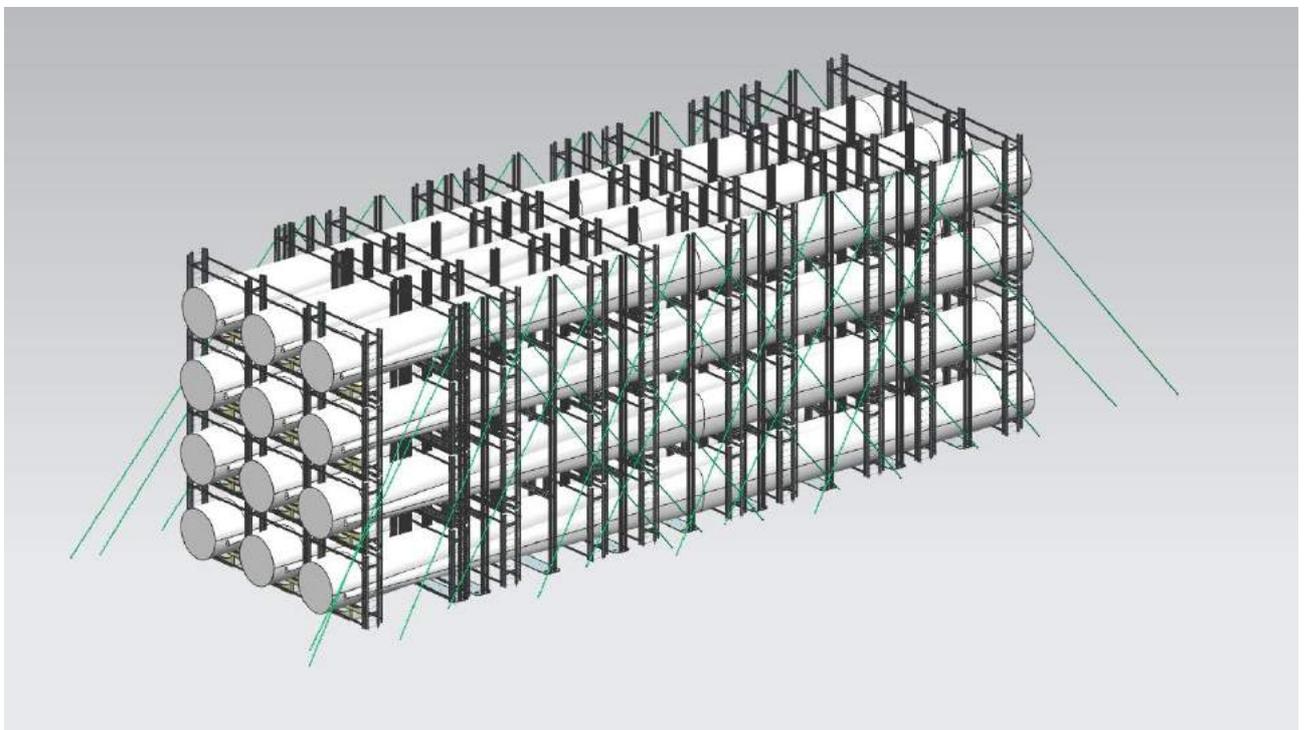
Racks and Cutting Tools are Adjusted for 5 MW blades
